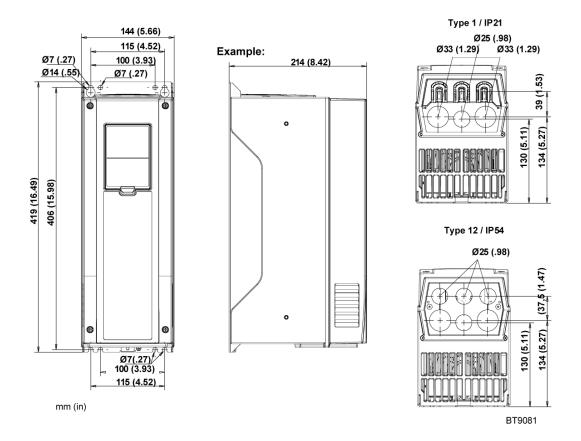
Siemens Drive Dimensions, FS5, Wall-Mount.
